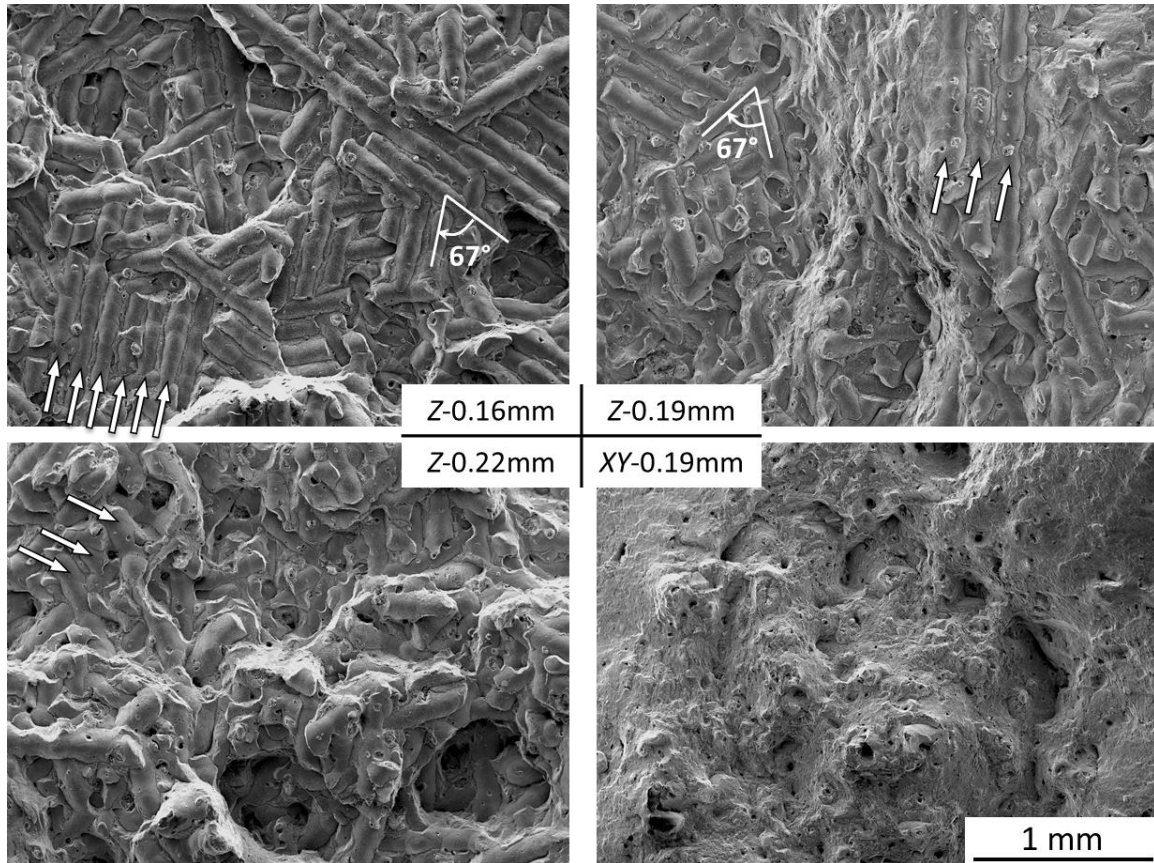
Fracture surfaces of AlSi10Mg tensile samples in this work. The arrows indicate the individual melt pools which are visible on the fracture surfaces.
